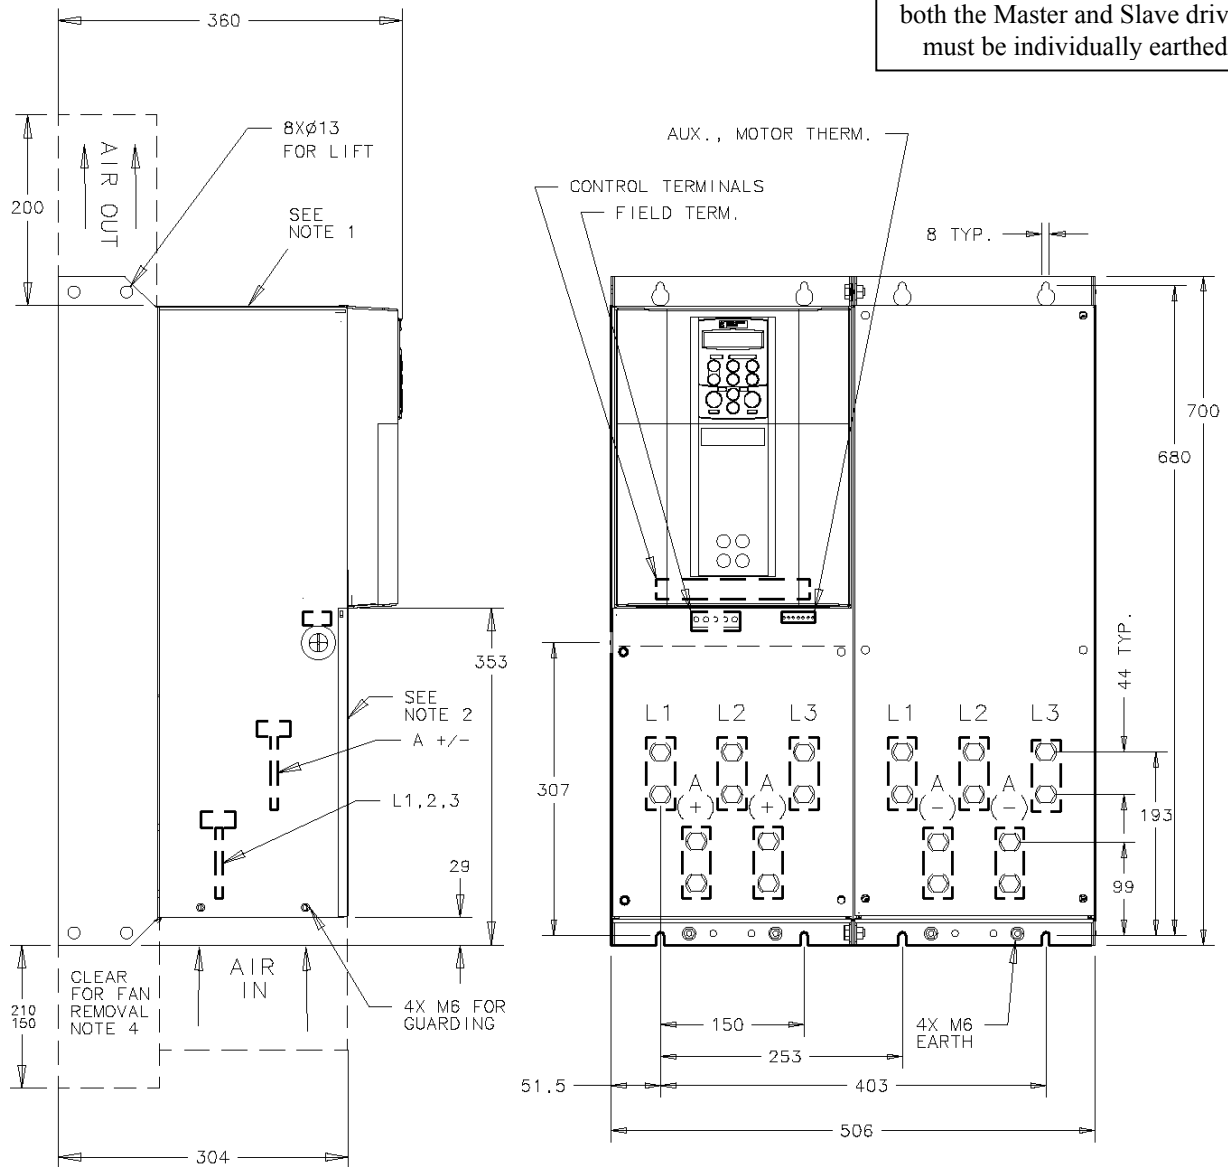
Frame 4 : 380-830A External Vent Kit Installation – Drg No. HG466700U002
